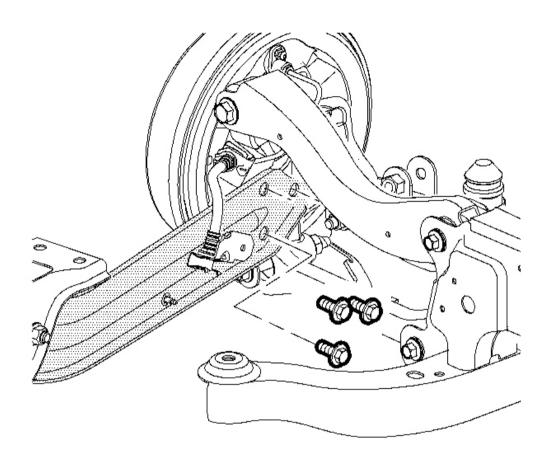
Trailing Blade & Knuckle Bolts Courtesy of GENERAL MOTORS CORP.
